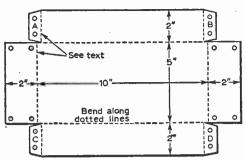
With this single-piece chassis all holes are drilled AFTER bending is completed, and the line of bend of lips is set back from main bend—see text.
